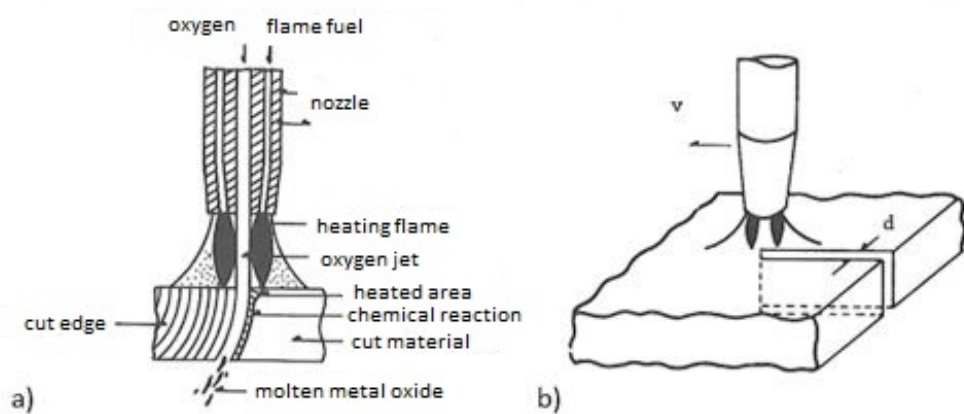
Principle of flame-cutting. In figure b) v is the cutting speed and d is the cutting width. [3]
